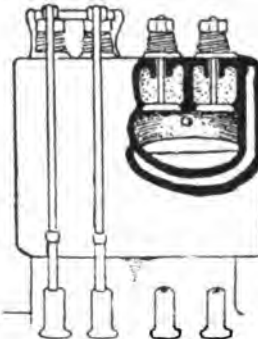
Overhead mechanically operated inlet and exhaust valve.
